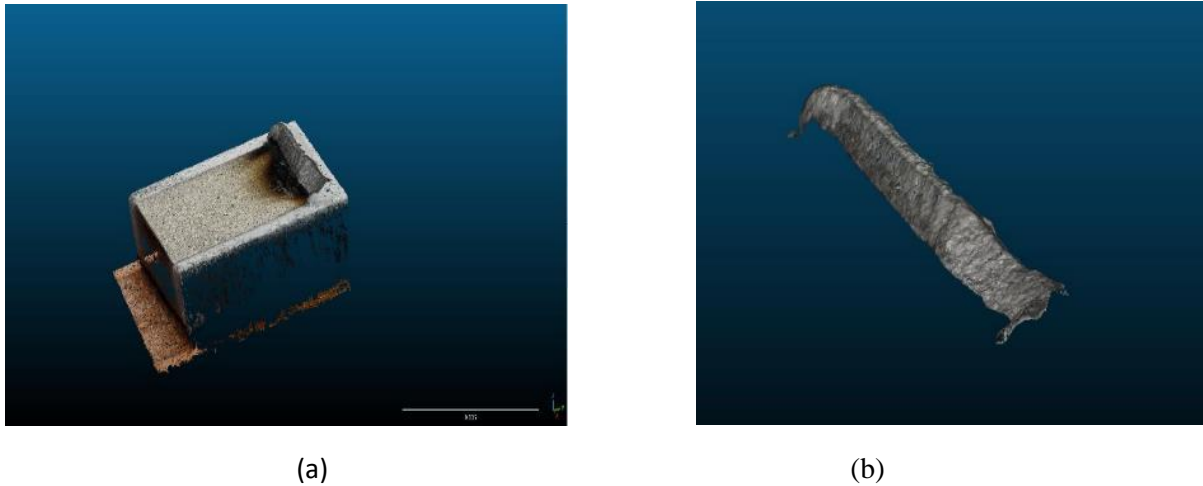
Typical example of (a) 3D specimen model and (b) Extracted weld surface area.
